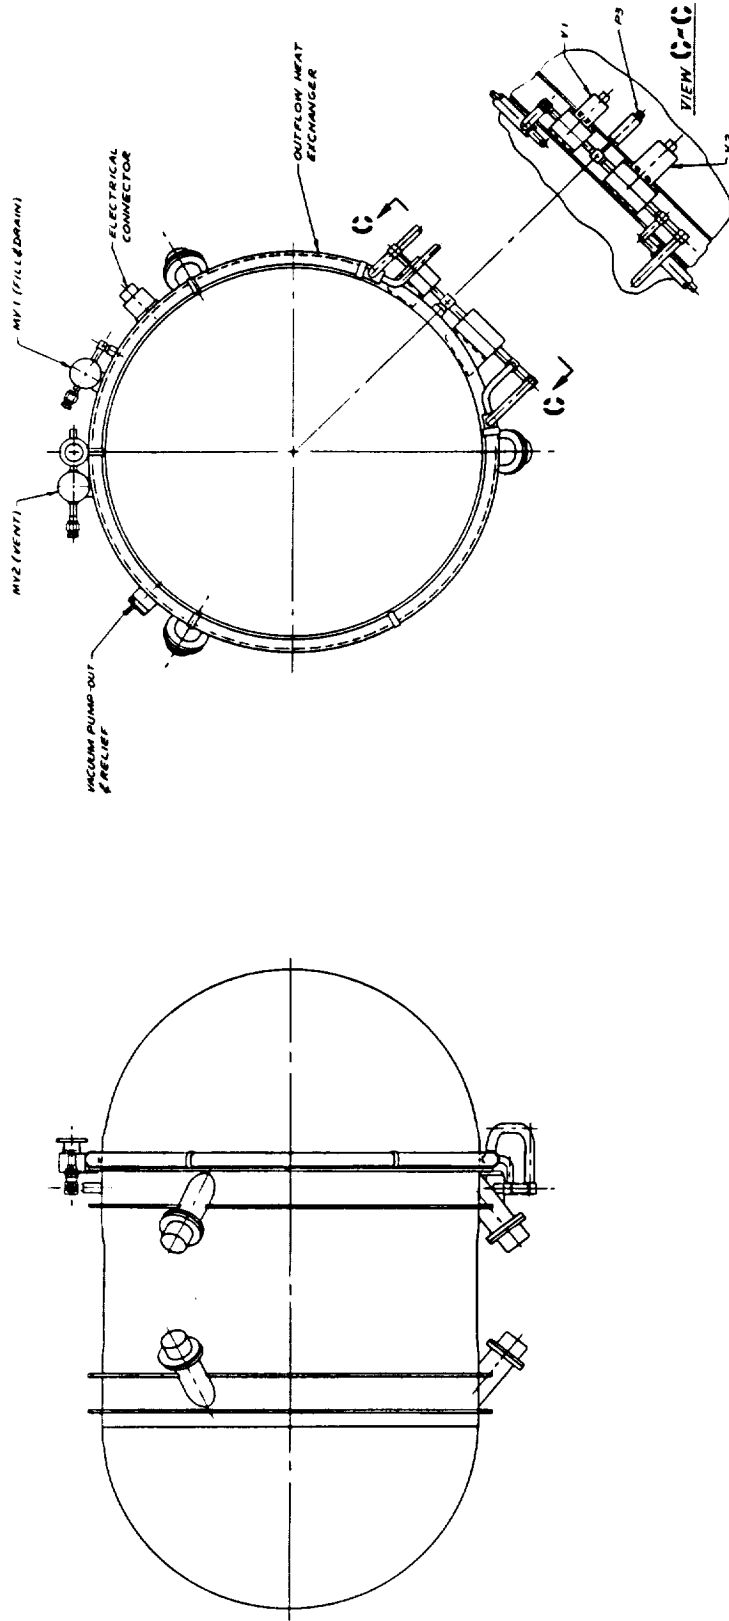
Storage Tank Vacuum Jacket External Design Details
